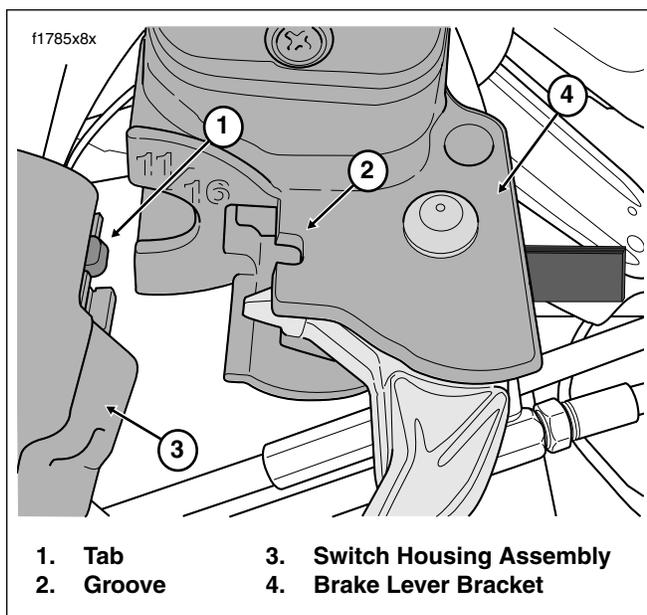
Fit Brake Lever/Master Cylinder to Right Handlebar Switch Housings
